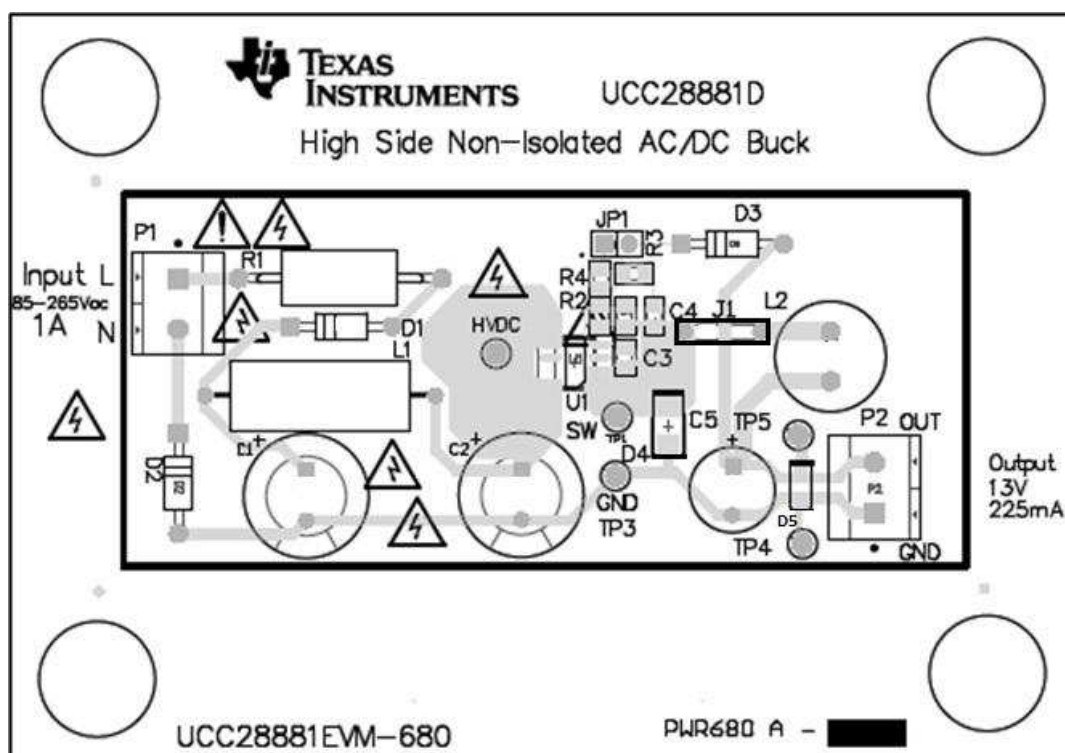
UCC28881EVM-680 Assembly Drawing/Layout
